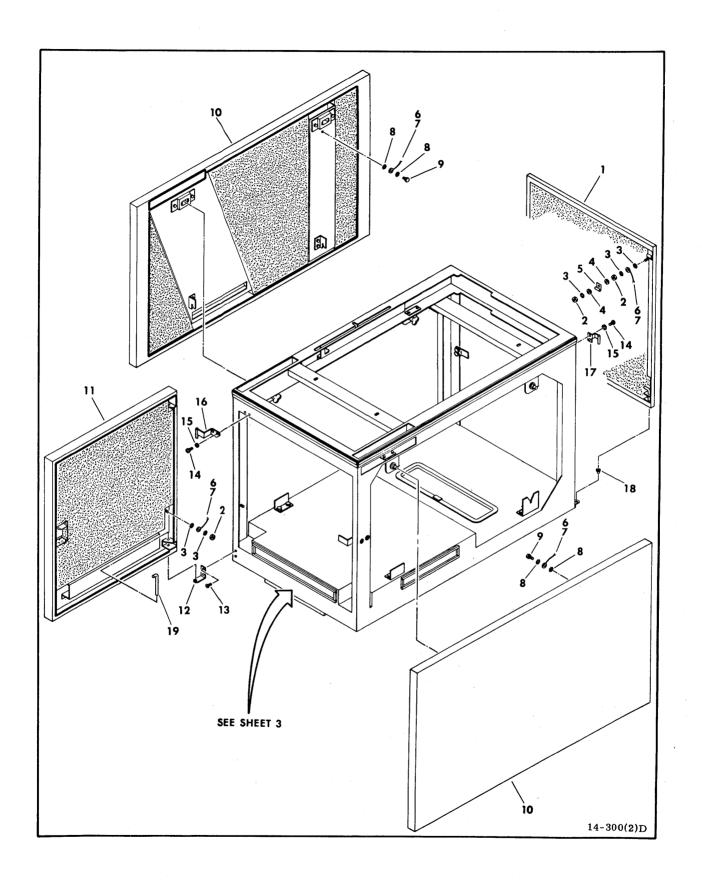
Final Assembly - Acoustic Cabinet (Sheet 2) 83322150 W
